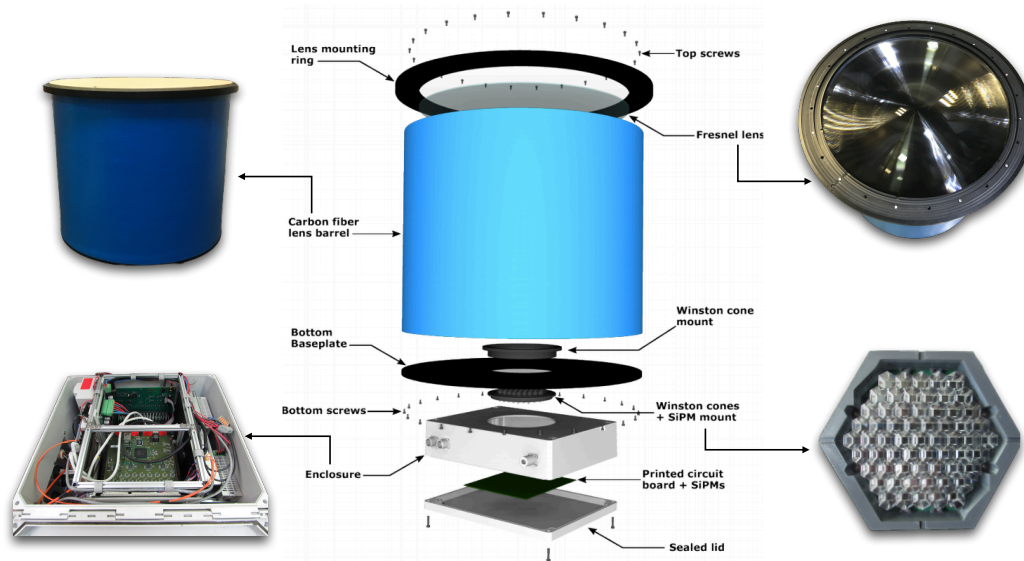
Exploded assembly drawing of the telescope construction. Based from [Schaufel, 2017].
